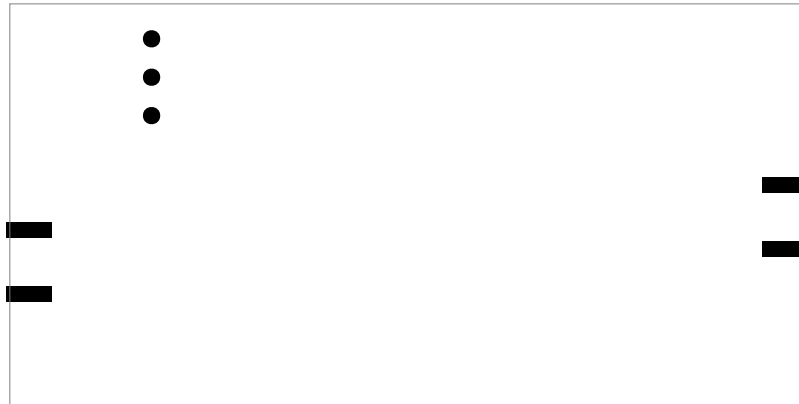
Bottom solder mask layer for pulse generator revision 4 (4mm).
